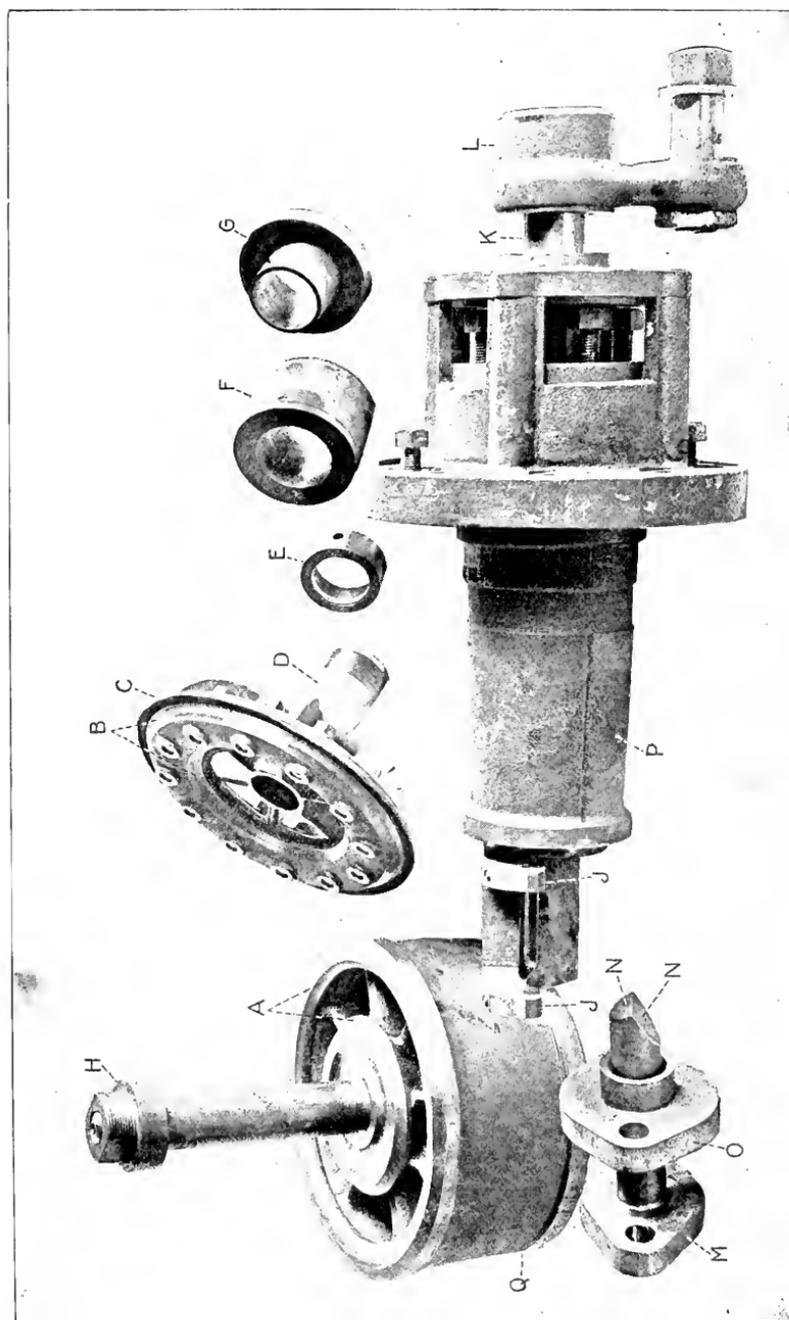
THE RIEDLER VALVE, CONSTRUCTIVE DETAILS.
